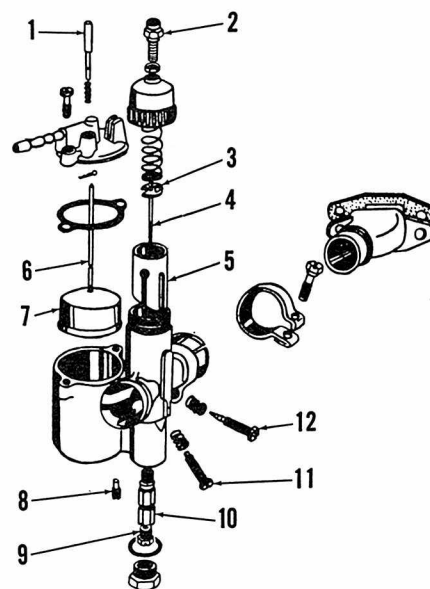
Exploded view of Fisher-Amal carburetor used on 175cc models.
